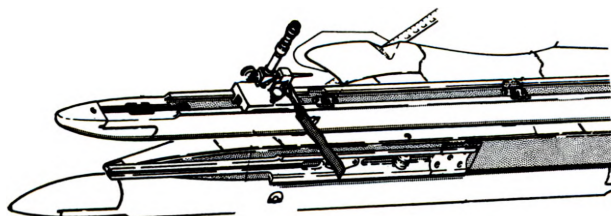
Sidewinder launcher track boresight fixture assembly.
